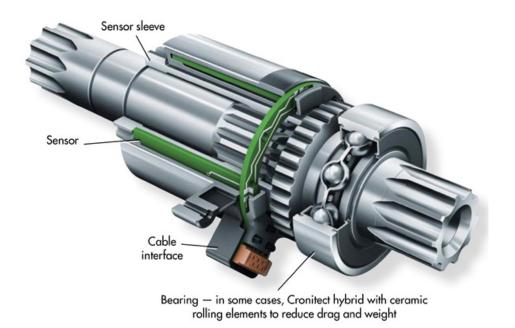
Pedal axis torque sensor module (Machinedesign, 2013)
